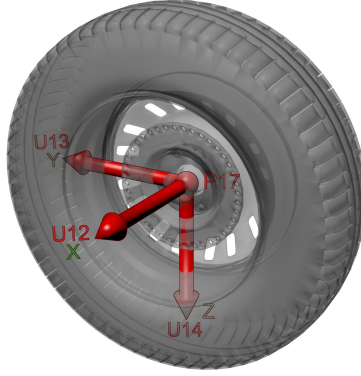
Points, vectors, COG, reference set of the front right wheel assembly
